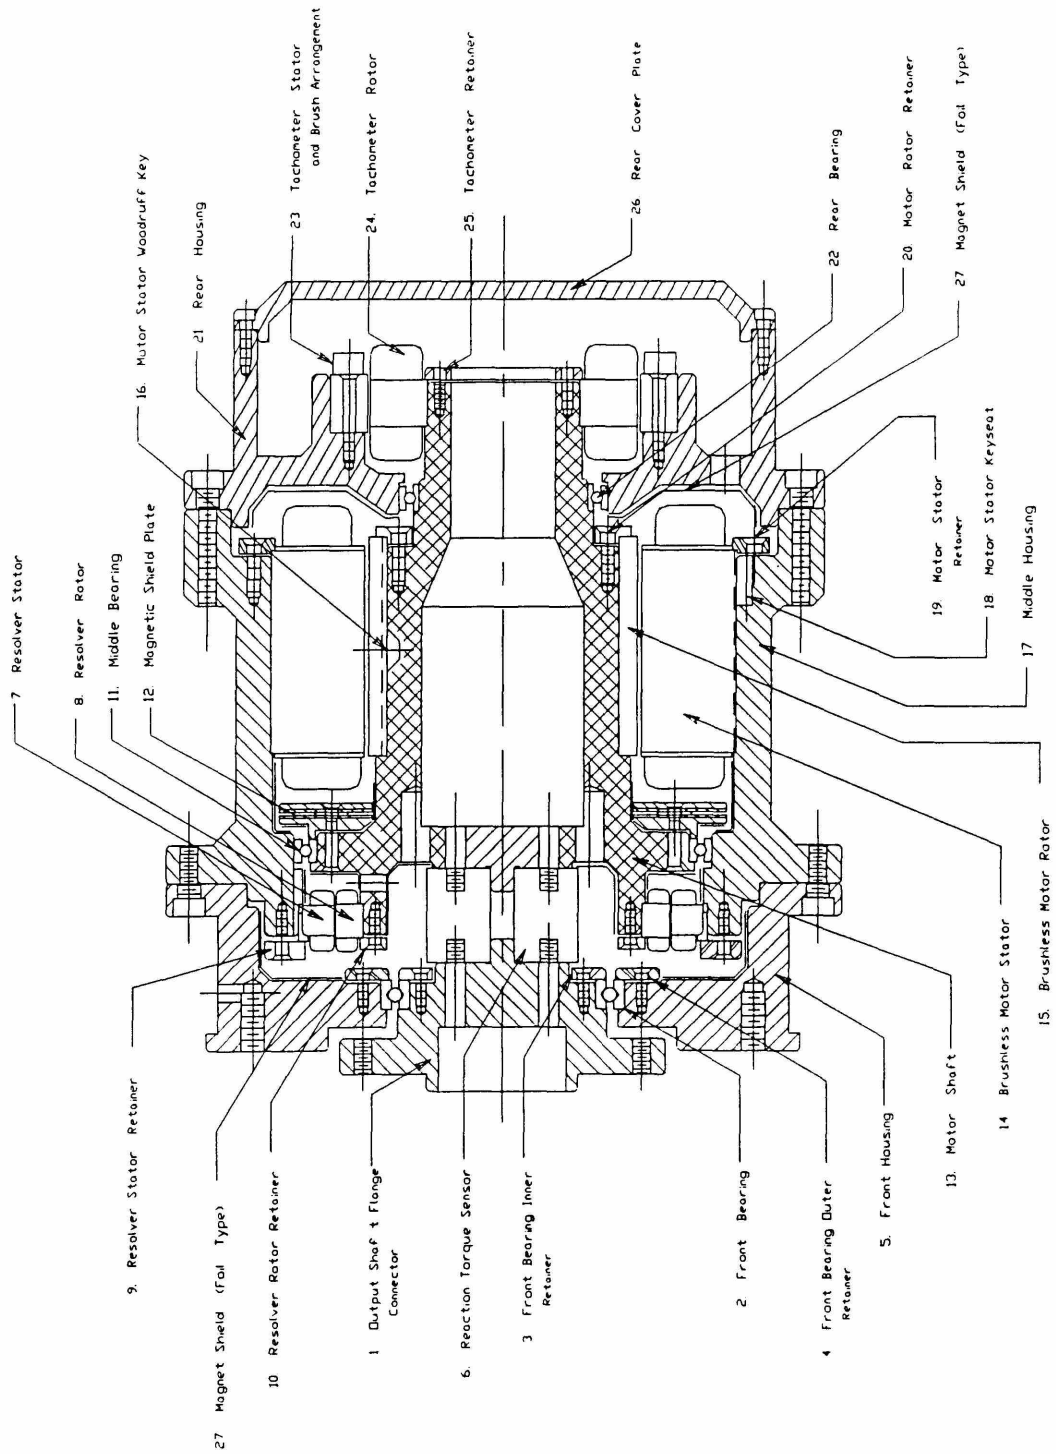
Cross-section of Actuator Package [Charnnarong, 1991]
